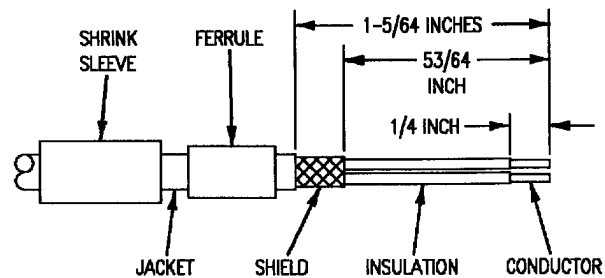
31-34179-1 Twinax Connector Repair (Sheet 3)
